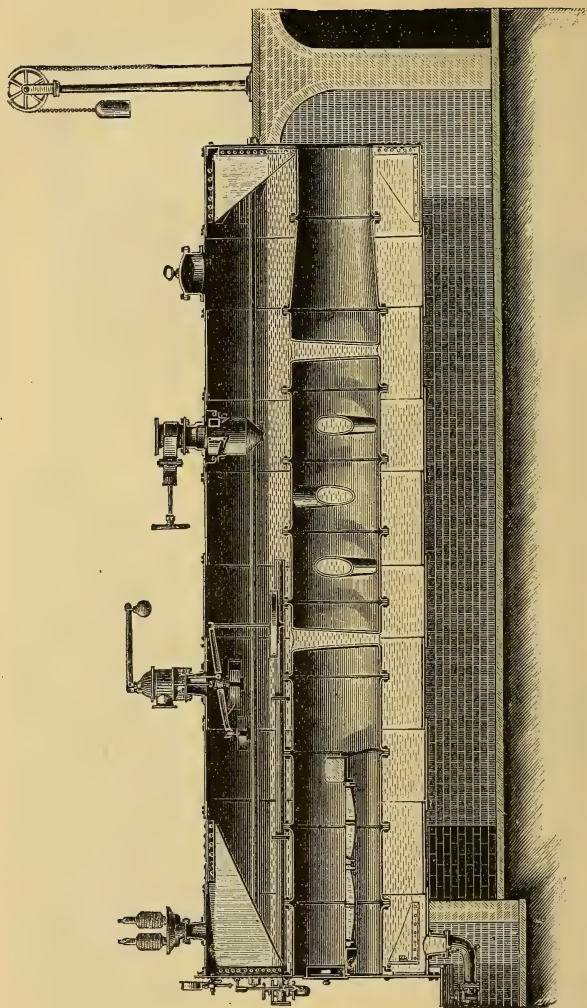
LANCASHIRE BOILER; LONGITUDINAL SECTION.
